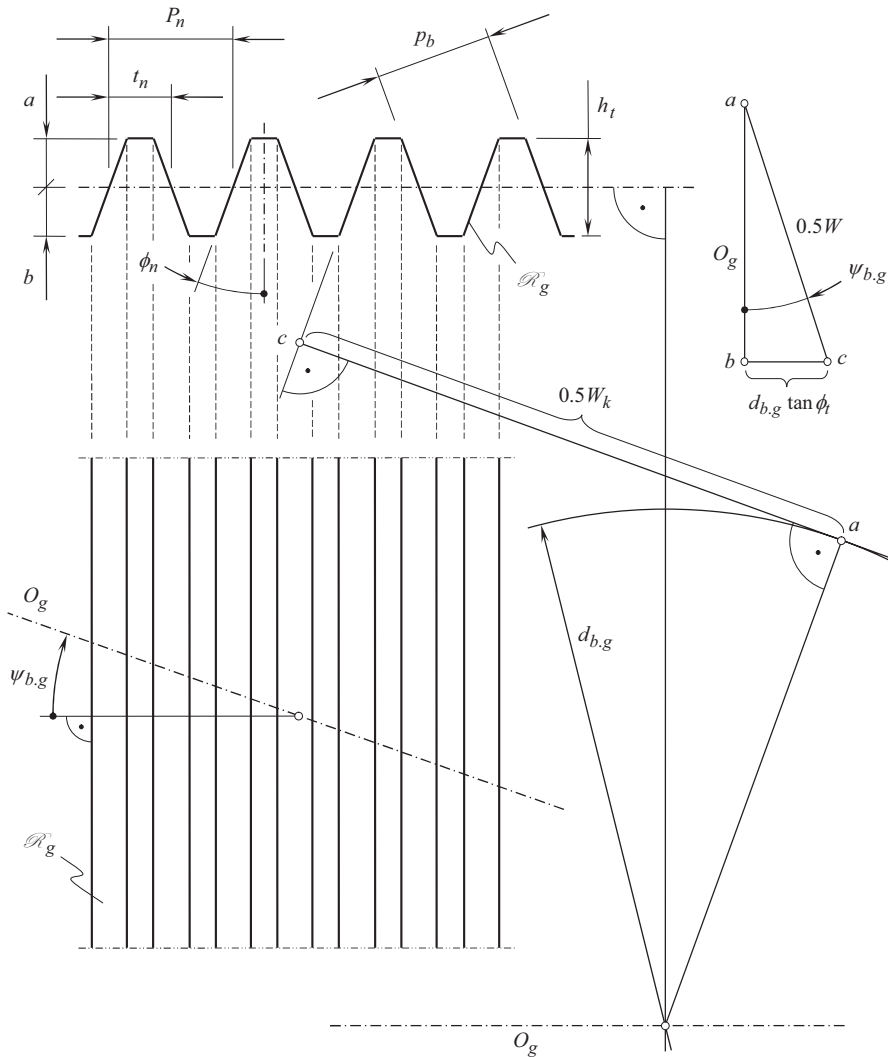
Calculation of the span measurement,  $W_k$ , in a helical involute gear.
